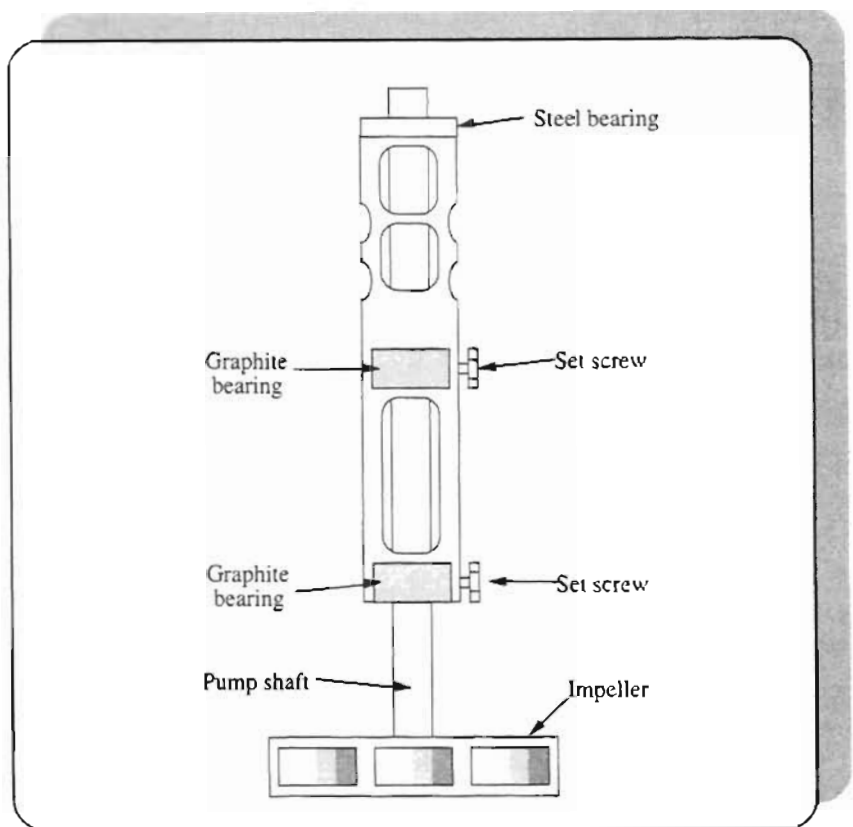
Centrifugal impeller, used to pump solder in a typical wave soldering machine
